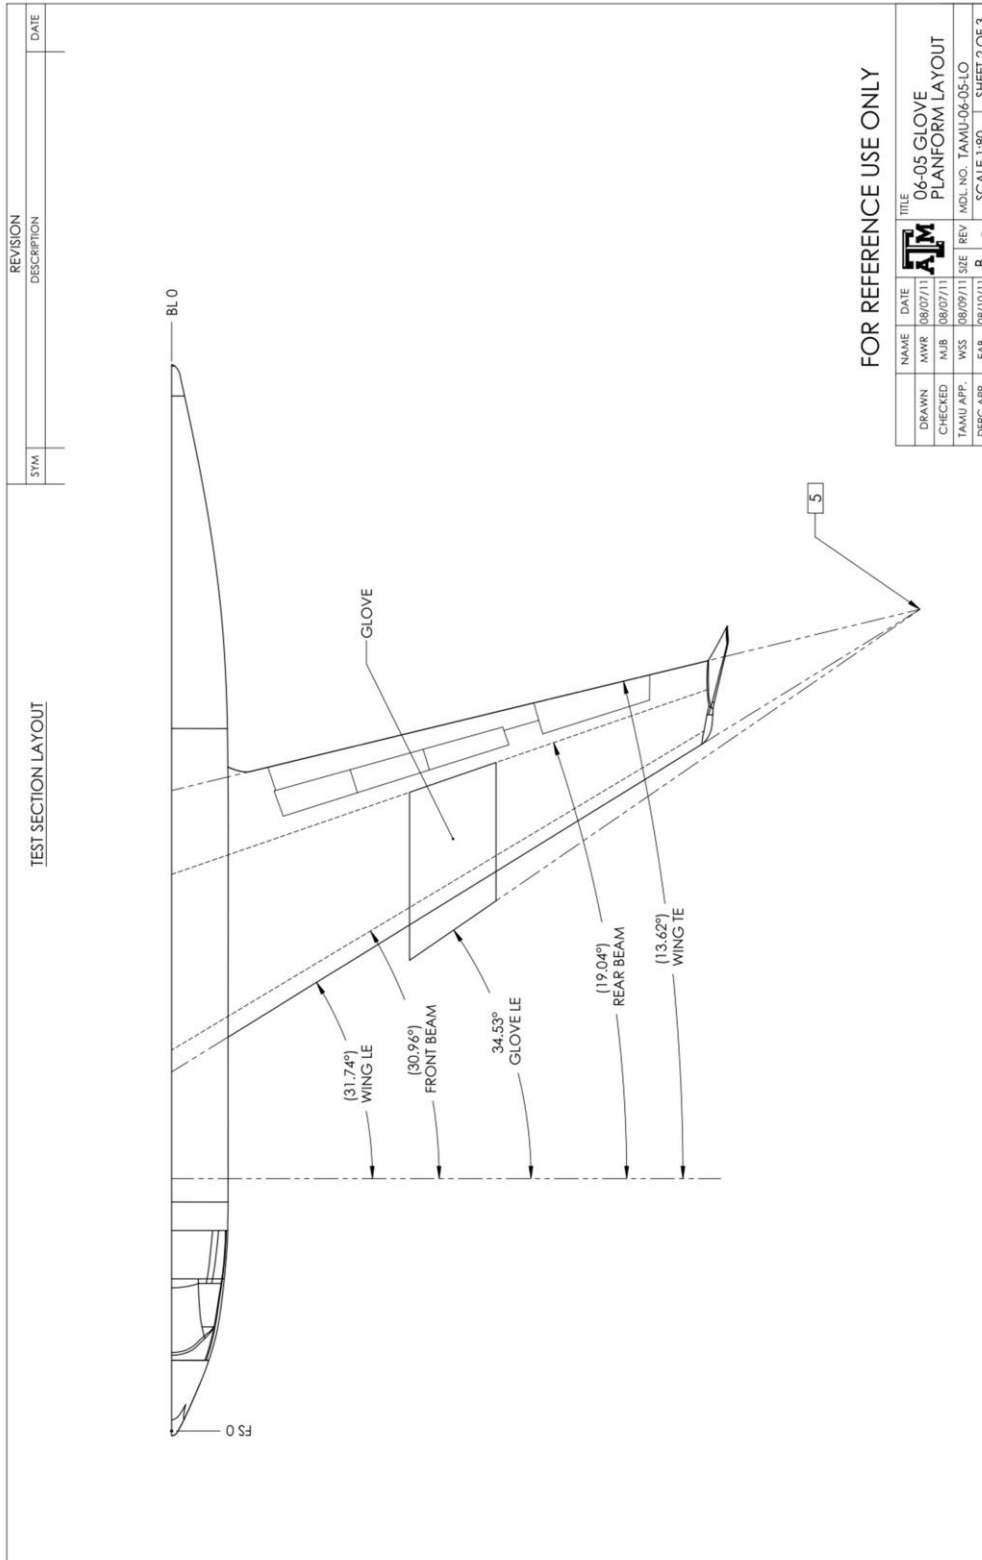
Sheet 2 of the 06-05 Glove Planform Layout drawing: test section layout.
